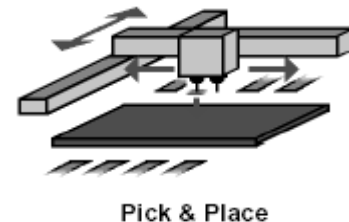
An example of pick place multi head placement machine (taken from [6]).
